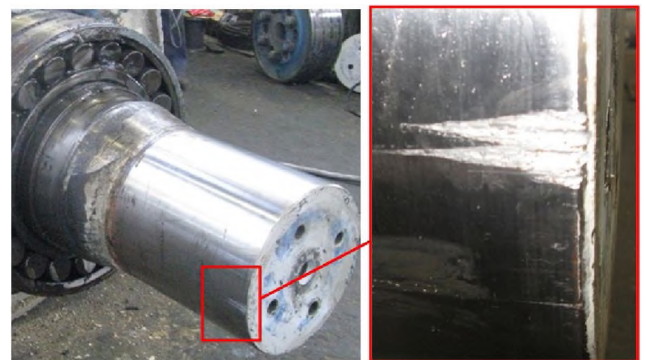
Damage to the drive pulley shaft due to replacement of rigid flange coupling
